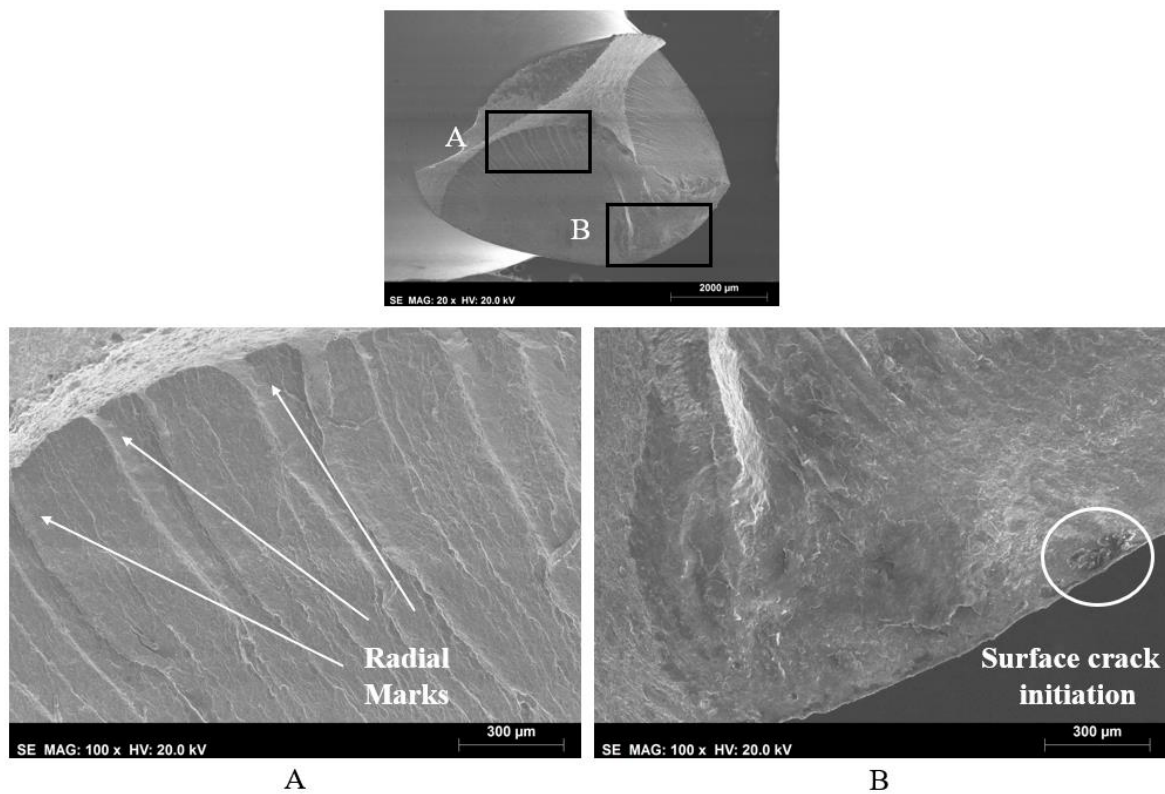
Pure torsion specimen 4 fatigue crack surface: (A) radial marks; (B) surface crack initiation.
